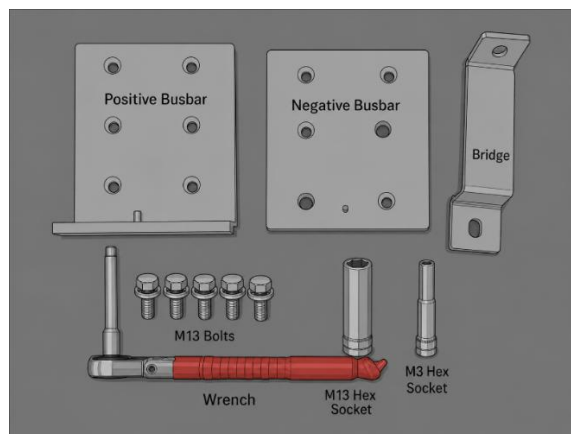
Required tools and parts (Pro busbars, bridge, M13 bolts, sockets, wrench)
